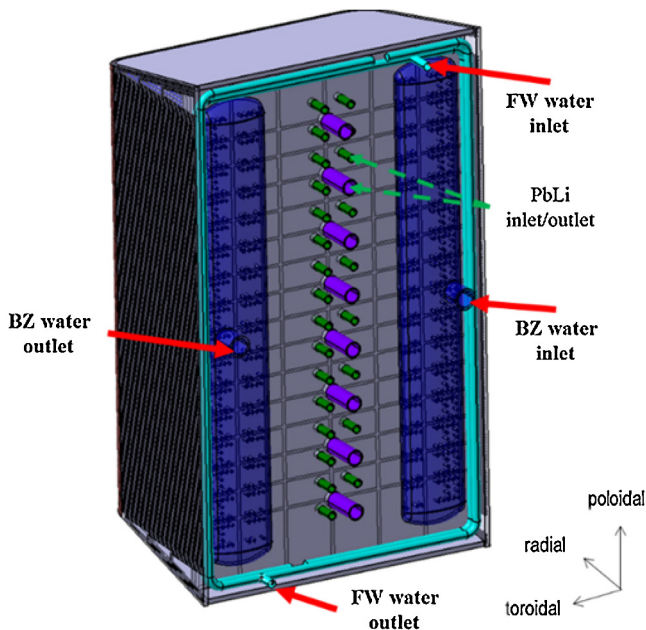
CAD of the rear side of the WCLL OB4 BM, showing the coolant I/O manifolds.
